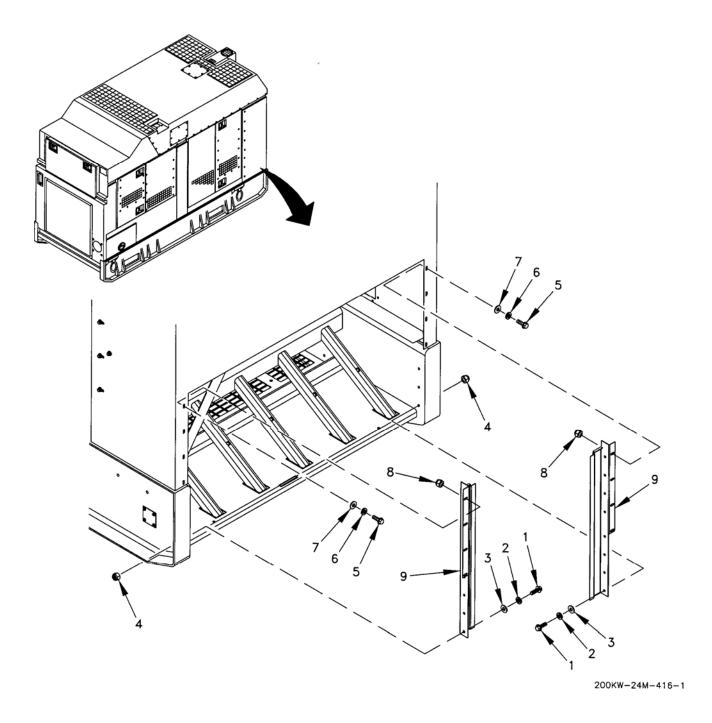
Front Section Housing Assembly (Sheet 1 of 2).
